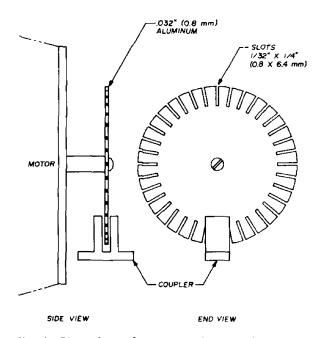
Plan view of the pulse tachometer. The author used a 33-slot wheel for his Kleinschmidt page printer, but suggests 60 slots if this controller is to be used with a Teletype Corporation machine.
